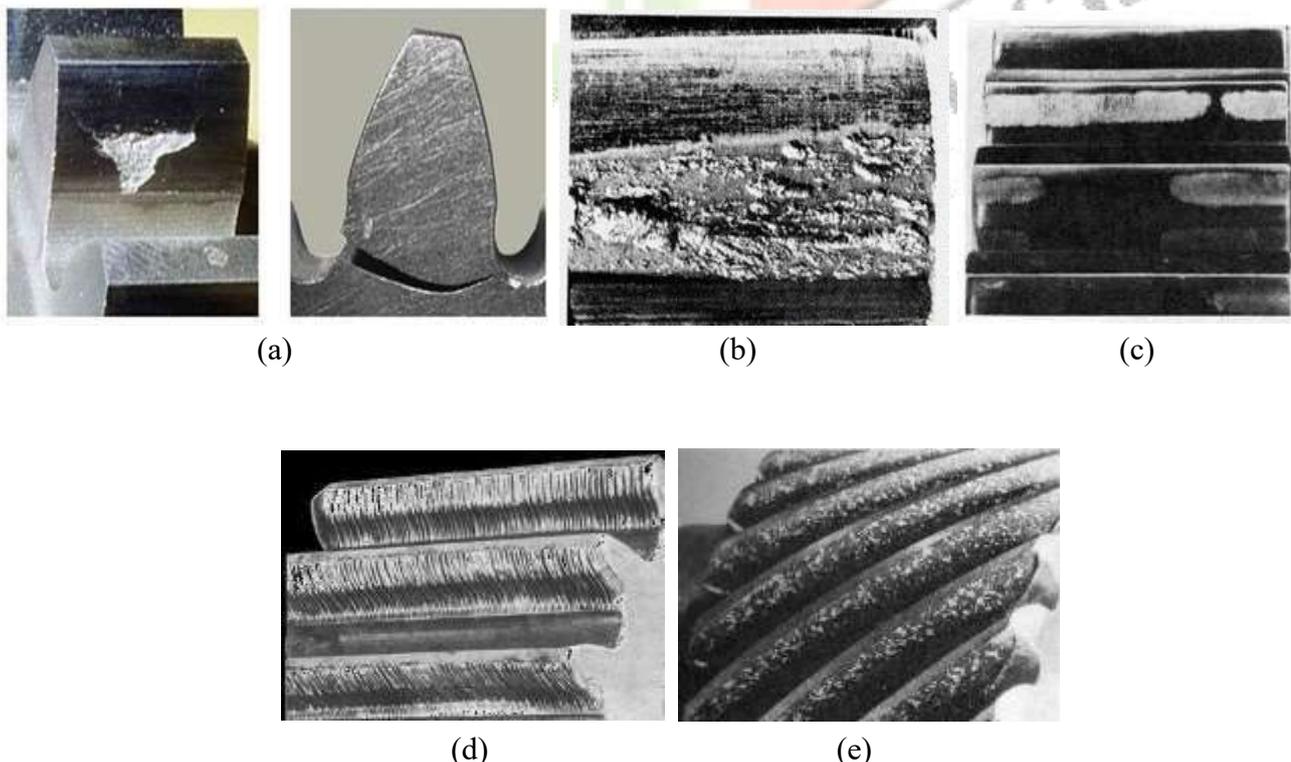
Modes of failure – bending (a), pitting (b), scoring (c), wear (d), and corrosion (e)[7].
